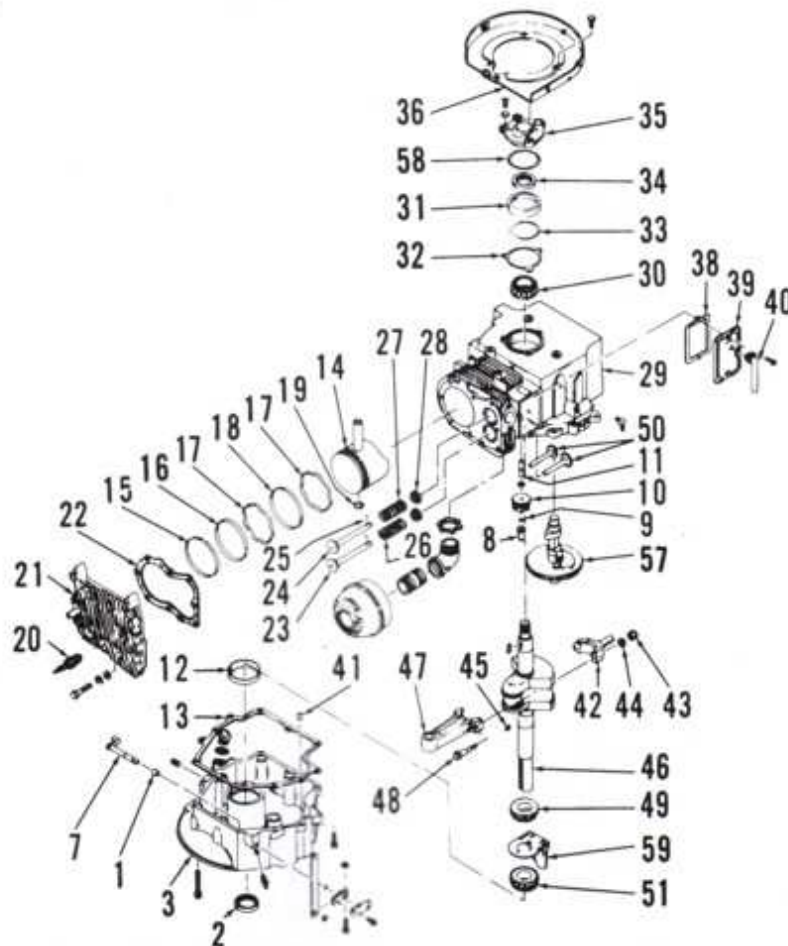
Exploded view of Model VH80 or VH100 vertical crankshaft engine.
